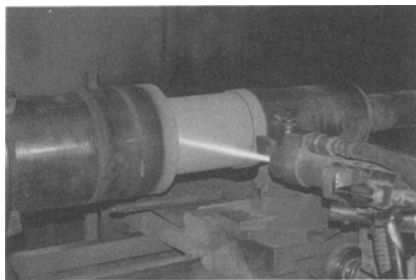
HVOF spraying of bearing mandrel for downhole motor
